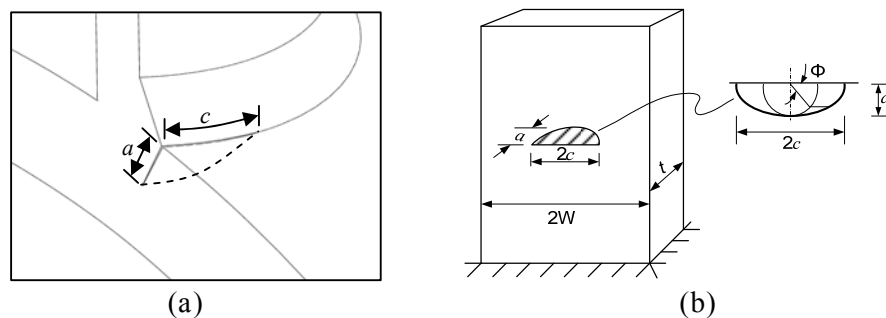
Surface cracks: (a) fatigue crack at weld toe of a tubular joint (half model); (b) surface crack in a plate
